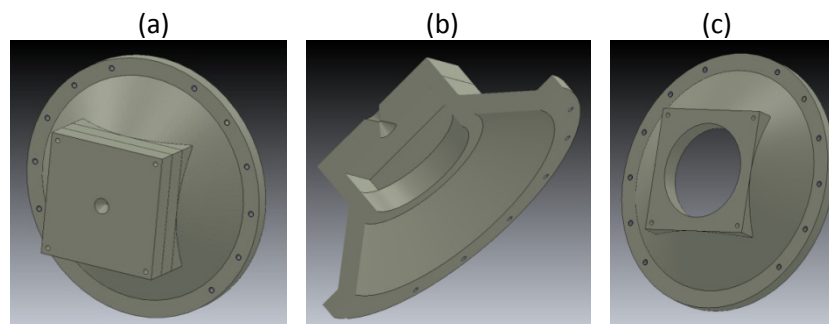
SolidWorks model of the system aperture showing the pinhole and one extender connected to the cone mounting plate (a, b) and a view of just the cone aperture (c).
